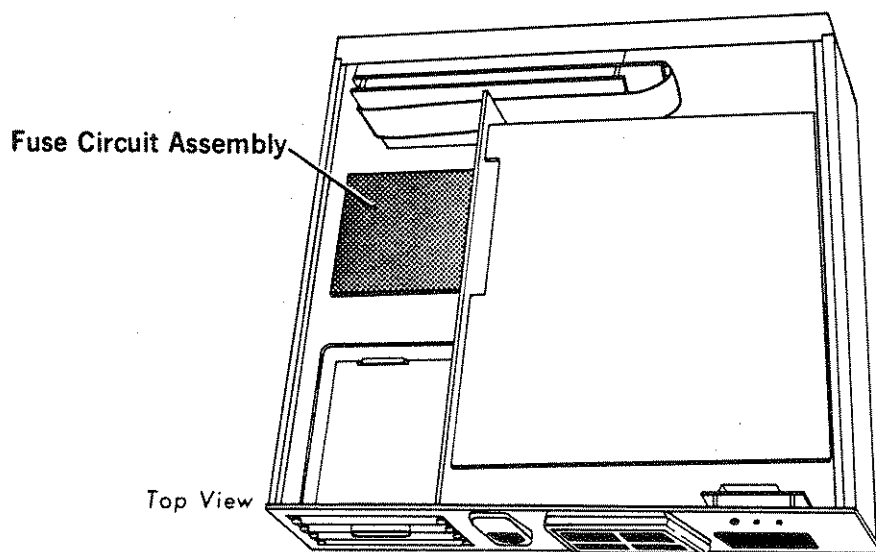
Location of Fuse Circuit Assembly (P/N 59128)
